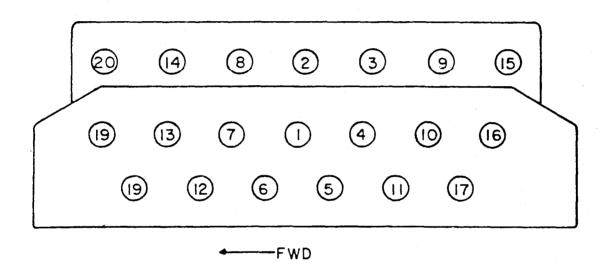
Cylinder Head Nut Tightening Sequence.
